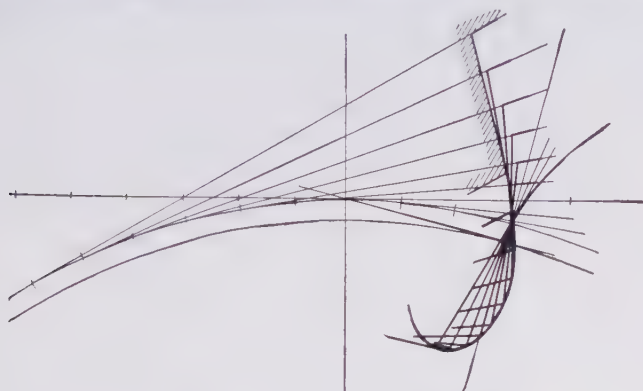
Undercutting of involute tooth by rack extending below the base circle.
